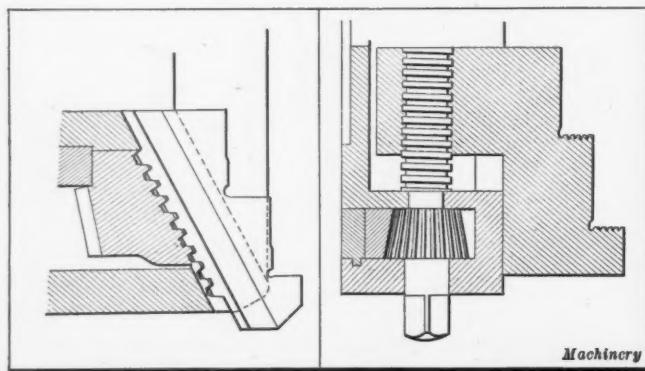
Taylor Spiral Chuck with Jaws Inclinably Mounted
